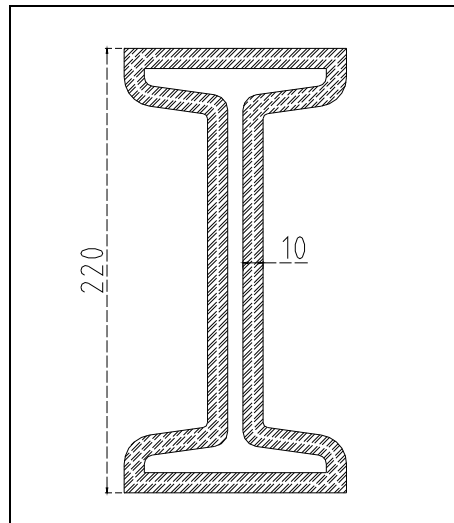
Cross-section of Welding Around I-200 Profile
